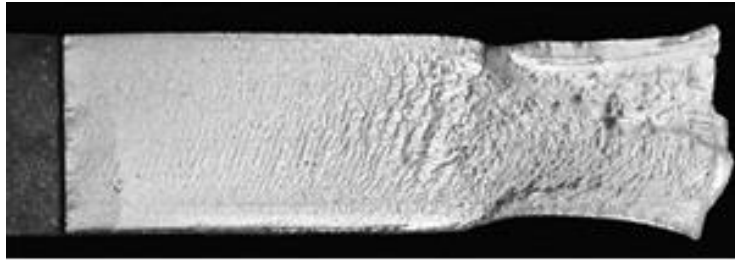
Fracture surface of the FSPed CT specimen
